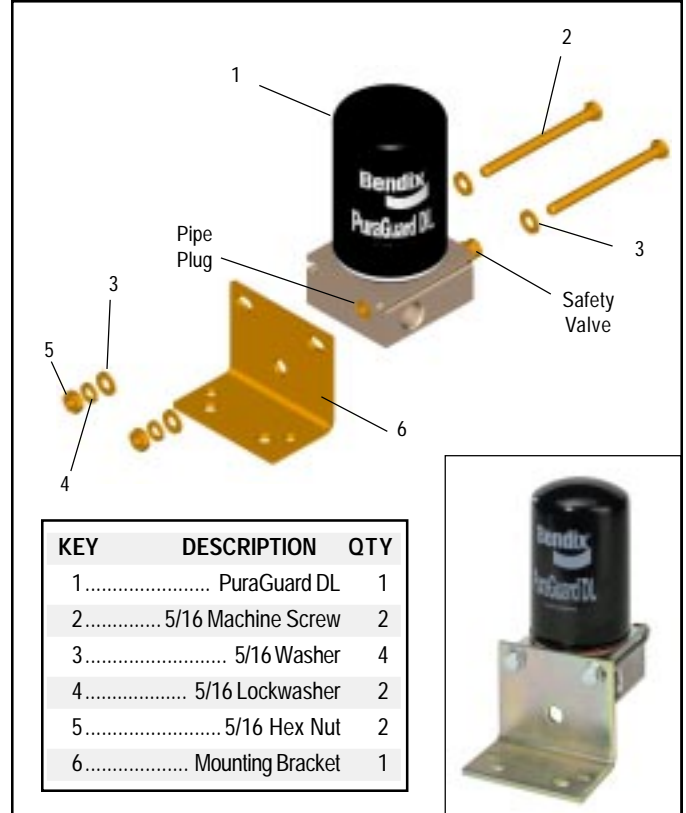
PURAGUARD DL EXPLODED VIEW
